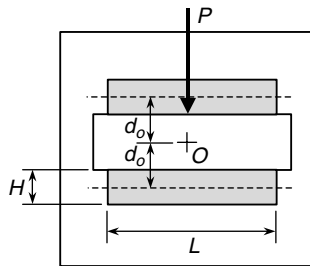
Fillet weld geometry for bending.
